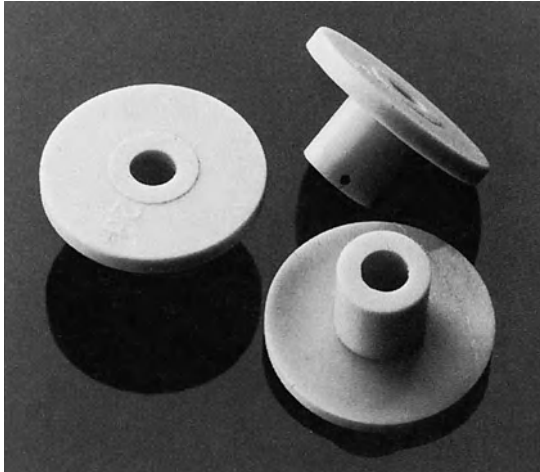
Edge-gated injection molded bushings of polyacetal copolymer
